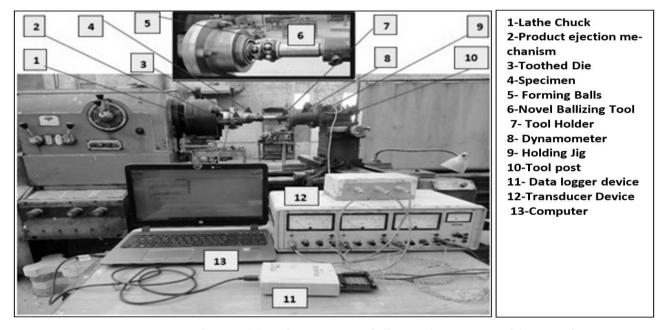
Experimental set-up of the multi-stages rotating ballizing technique as a novel forming tool
